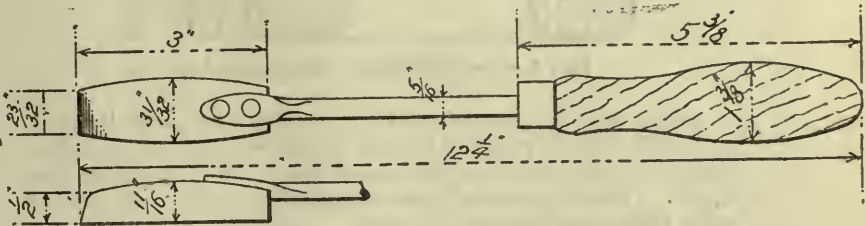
Iron, Soldering, Jointer's, 9 oz.
